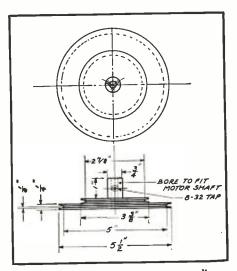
Design of two-step motor pulley used in Fig. 1. With it. a 78.26 rpm motor will drive a turntable of 11.75" groovebottom diameter at three disc speeds.
